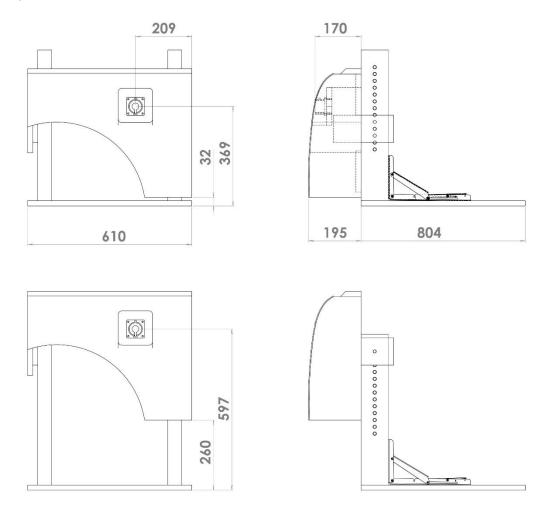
Test Fixture - (Top) Lowest Z-Axis, (Bottom) Highest Z-Axis (dimensions in mm, subject to fabrication tolerances)
